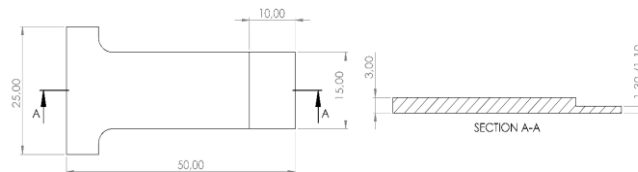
Powder bed fusion (PBF-LB/M) manufactured AlSi10Mg aluminum alloy test sample drawing.
